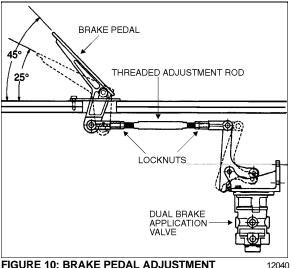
BRAKE PEDAL ADJUSTMENT
